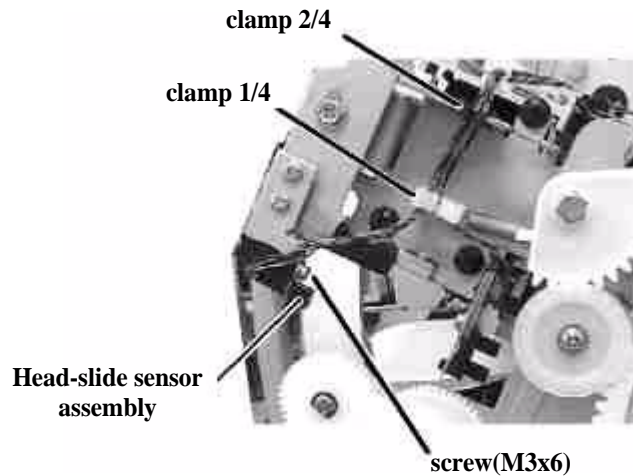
Removing the HEAD\_SLIDE Sensor Assembly-1
